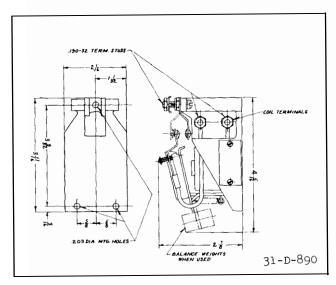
Outline and Drilling Plan for the Open Type SG Auxiliary Relay with Reversible Contacts. For Reference Only.
